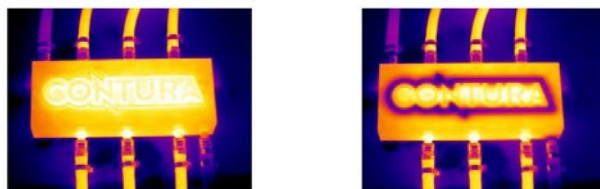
Thermal Photo of Heating and Cooling Phase of the mould insert
